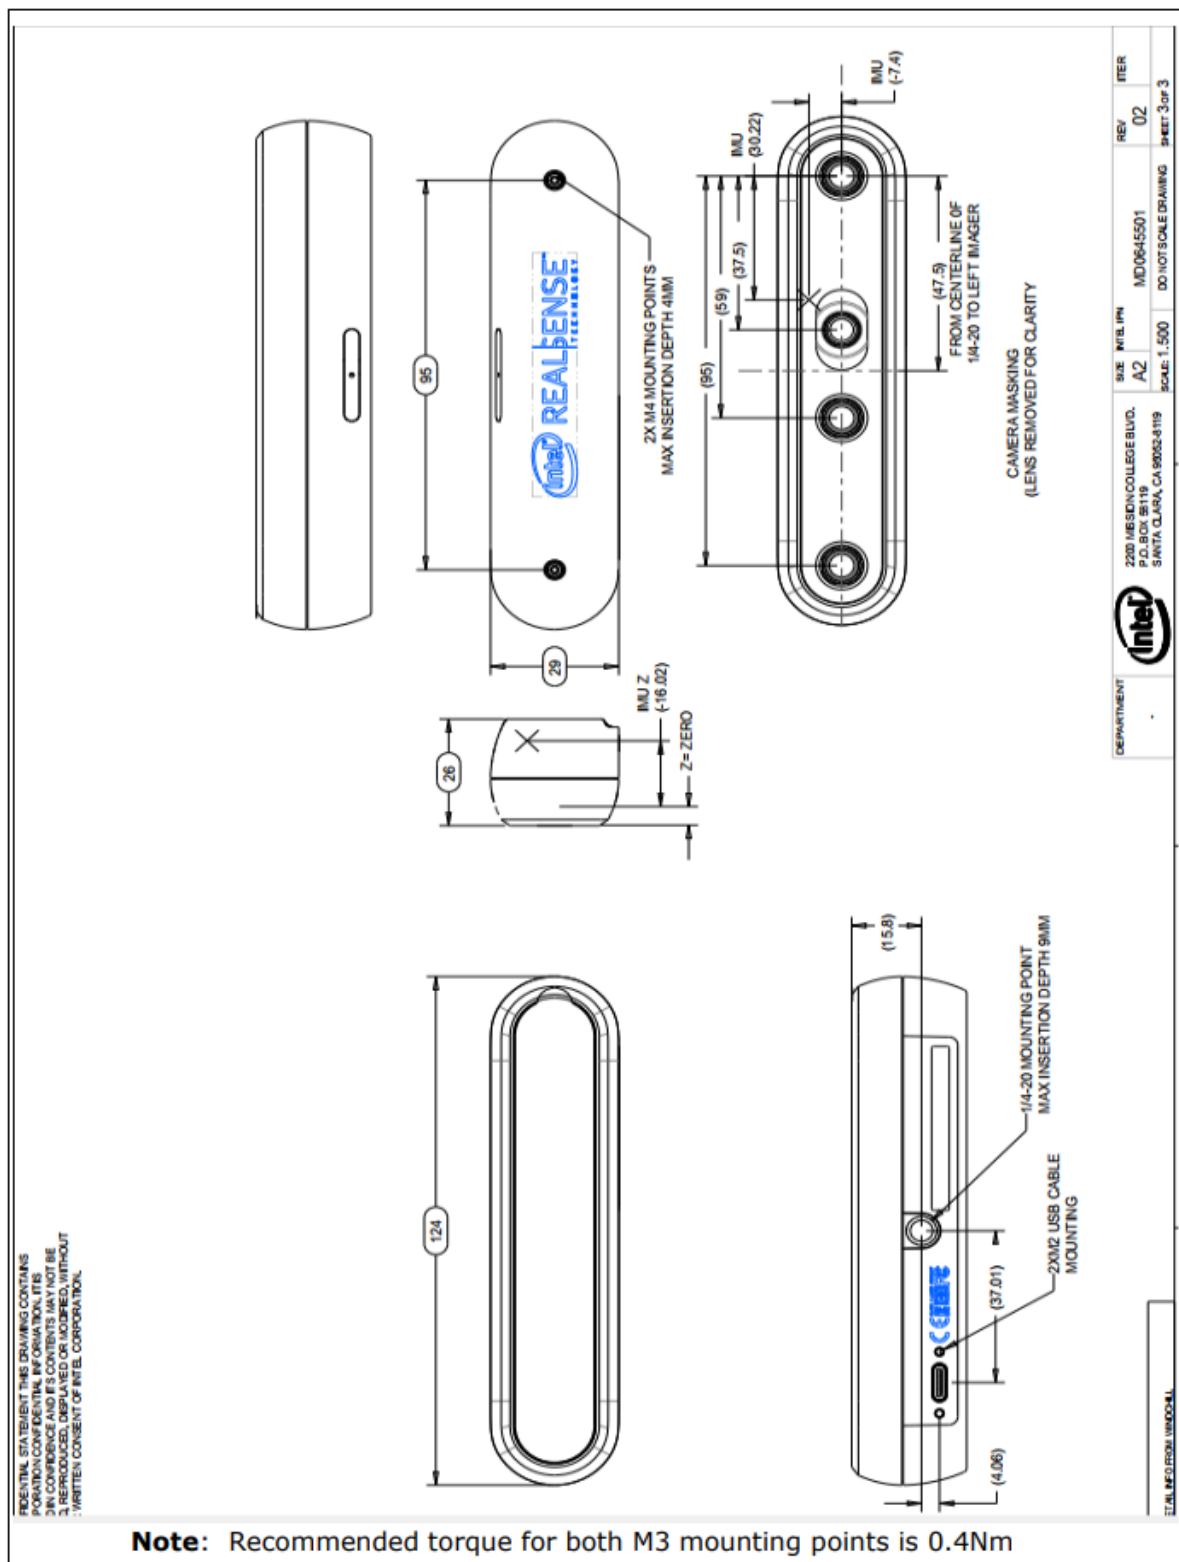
Mechanical drawing of Intel® RealSense™ D455 external housing. Source: [37].
